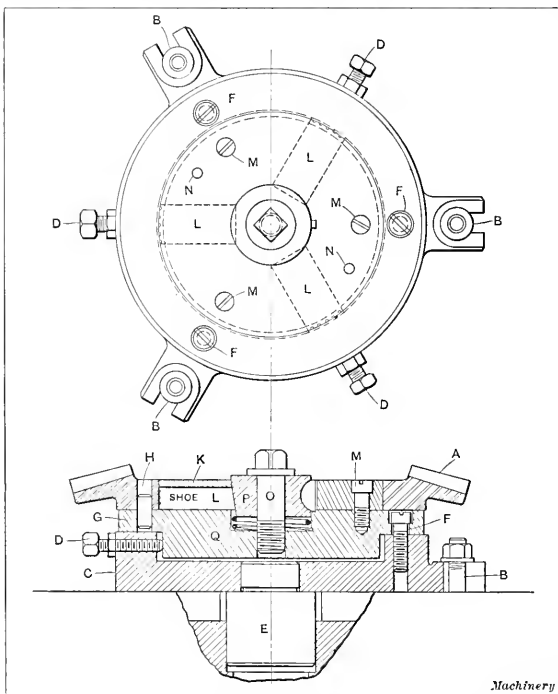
Vertical Boring Mill Fixture for holding Bevel Gear—The Three Shoes *L* are forced outward by Plug in Center
